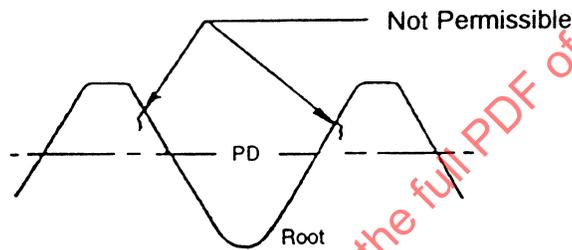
Laps Above Pitch Diameter Extending Towards Root, Rolled Thread
